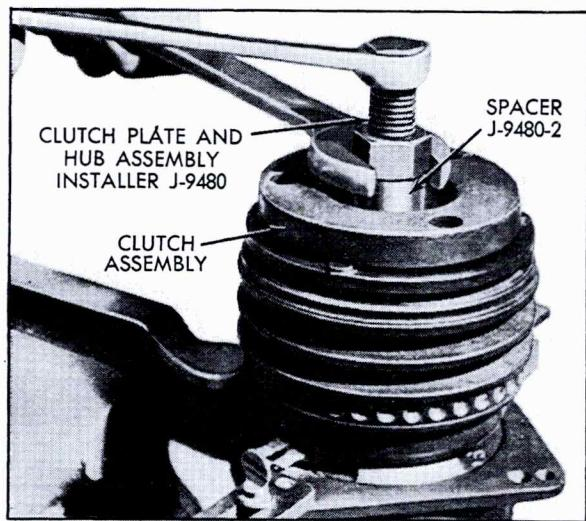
Installing Clutch Plate and Hub Assembly
